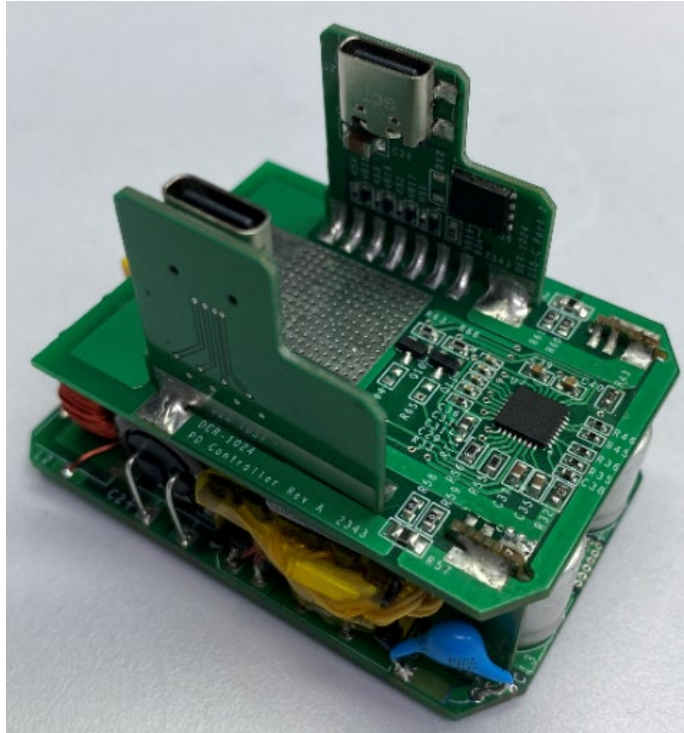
Populated Circuit Board Photograph, Entire Assembly.
